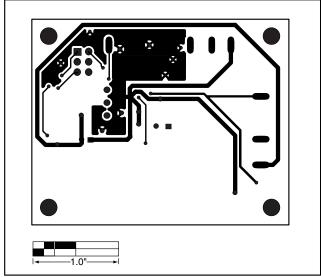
MAX5003 EV Kit PC Board Layout—Solder Side
